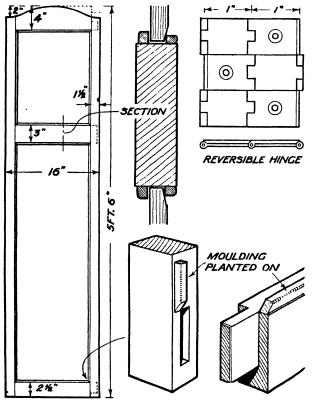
Scale Elevation of Screen, Section and Joint Details.
